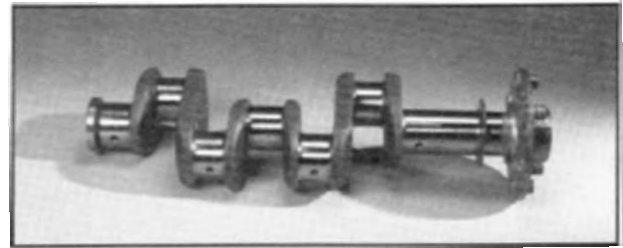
A typical four-throw crankshaft from a four cylinder, opposed engine is machined from one piece of steel.
